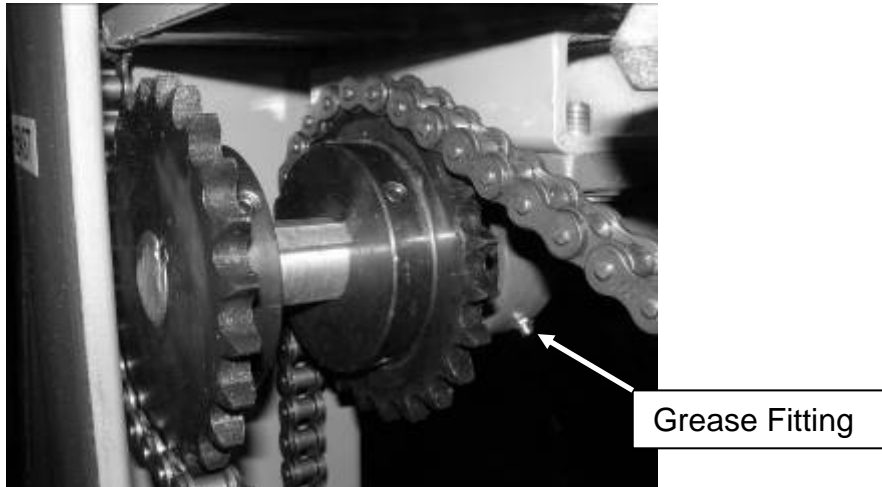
Shaft Bearing Lubrication – 4-Post Style Lifts
